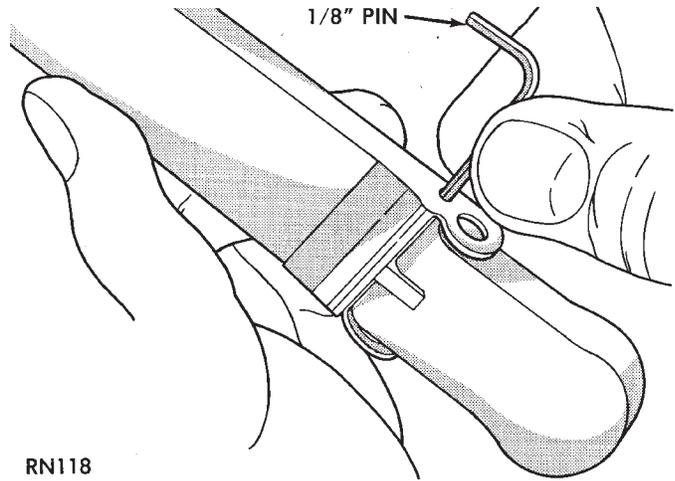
Removing Wiper Arm—AA, AC, AP and AY Bodies 16
